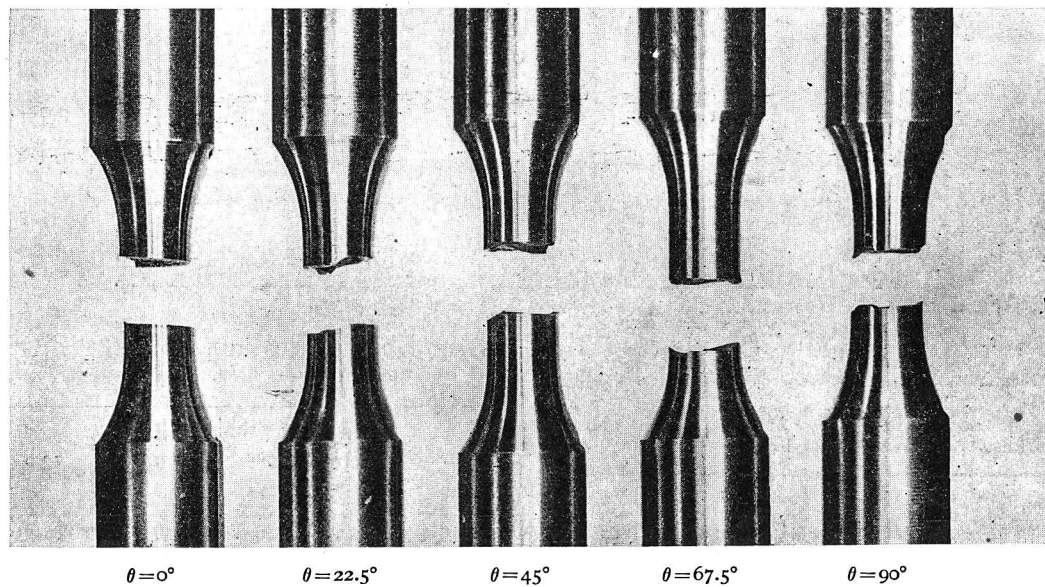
Fatigue Fractures of Nickel-Chromium Steel.
